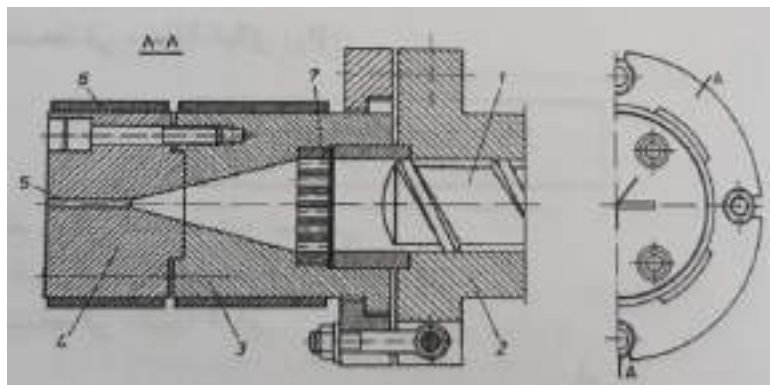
5. Extrusion Die Shows 1. Screw, 2. Roller, 3. Head Cover, 4. Head End, 5. Buffer, 6. Heaters, 7. Filter [38]
